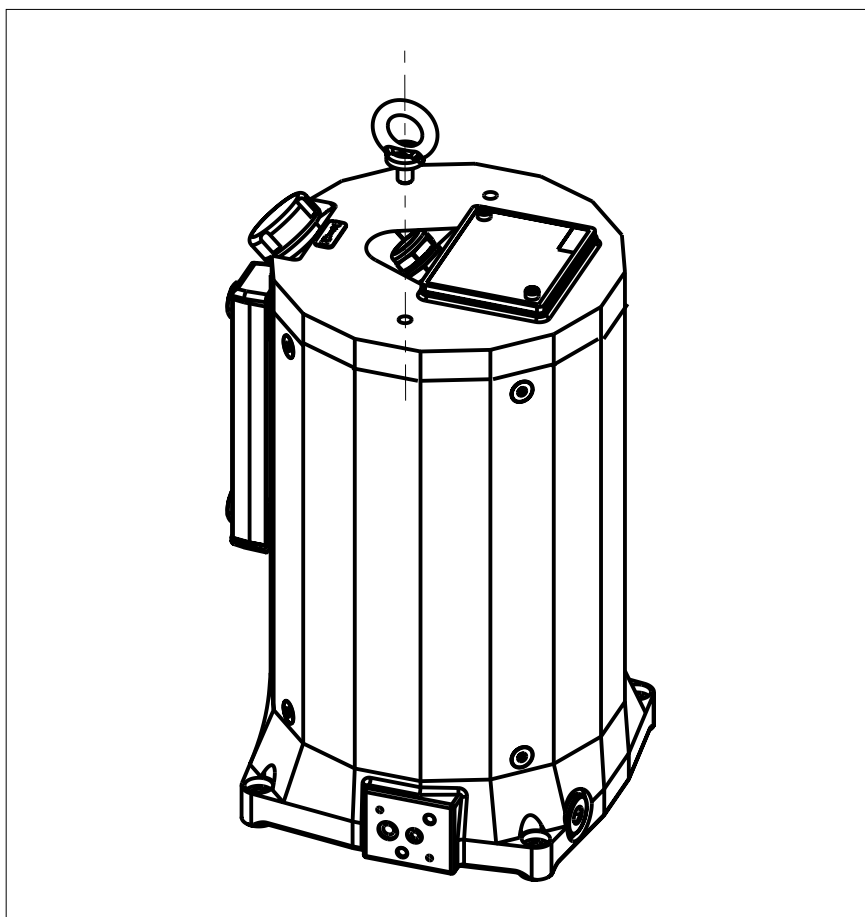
Tapped holes for ring bolt at the UPE2 (eyebolt)
